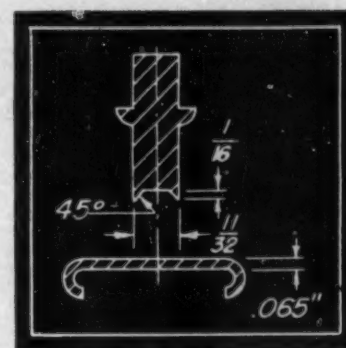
Right — Ring projection welded assembly showing machined projection. Very little flash results
